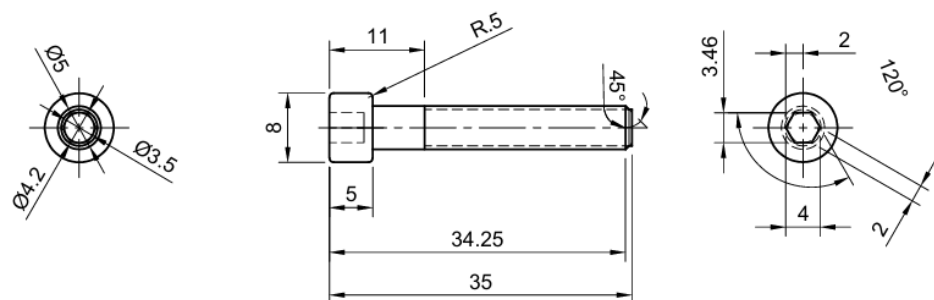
Bolt (Male Fastener) CAD Drawing and Dimensions Part 8
